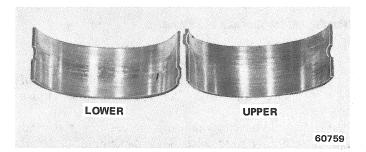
B-133 Scoring Caused by Insufficient Lubrication
